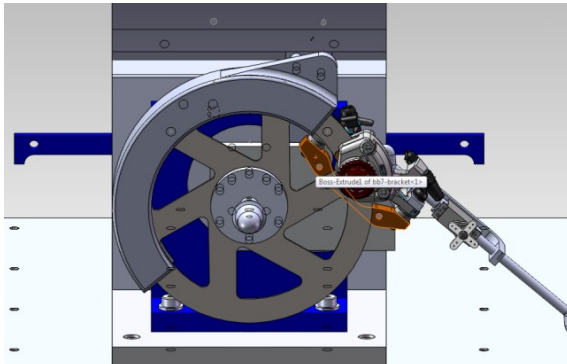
A solid model of the mechanical braking element of the dynamometer.
